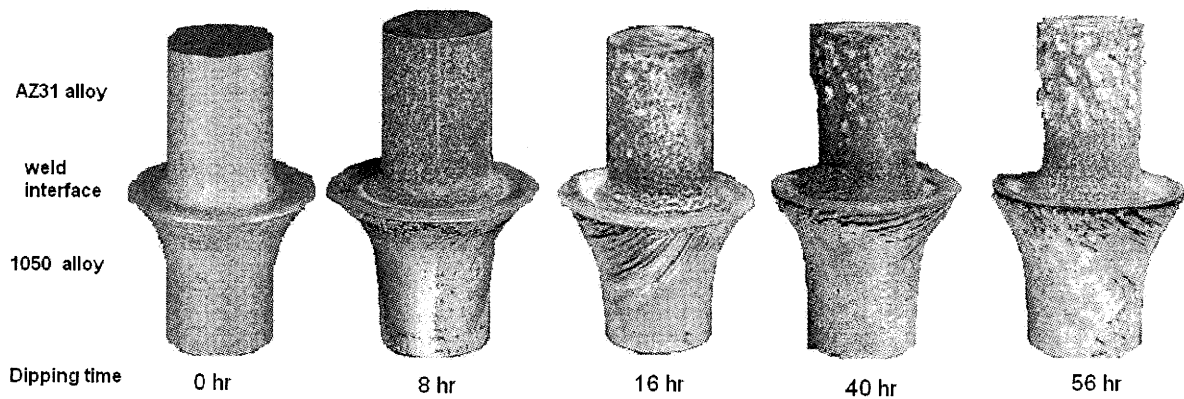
Appearances of corrosion tested friction welded joint with burr.
